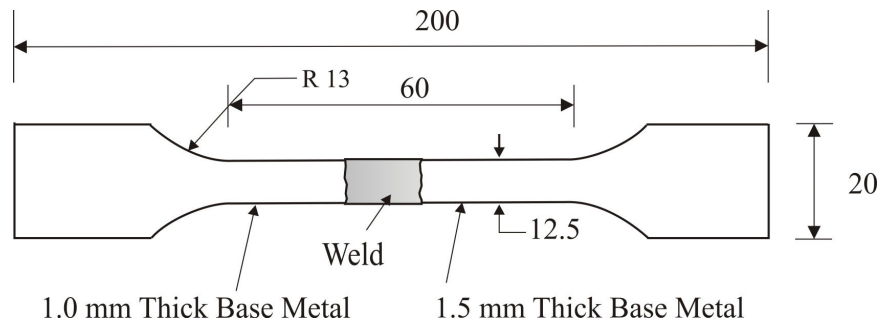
ASTM E 8M-04 modified half size tensile specimen (dimensions in mm).
